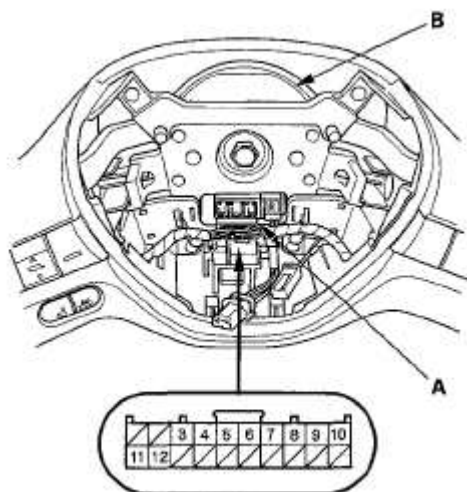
Identifying Voice Control Switch 20P Connector Terminals
